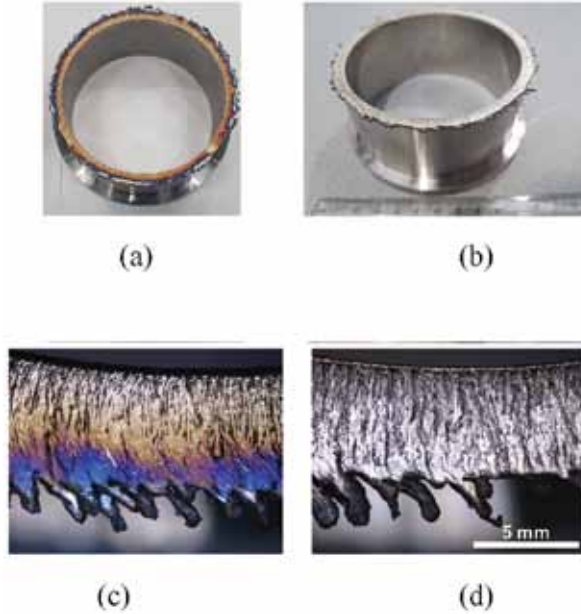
Photographs and micrographs of the surfaces of (a) and (c) P91 alloy steel cut pipe samples, and (b) and (d) 316L stainless steel cut pipes.
